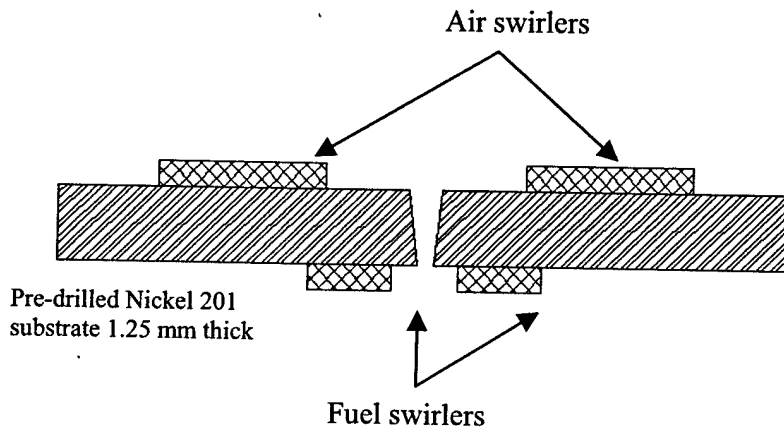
Cross-sectional view of swirlers formed on both sides of the plunge EDM-drilled connecting hole.
